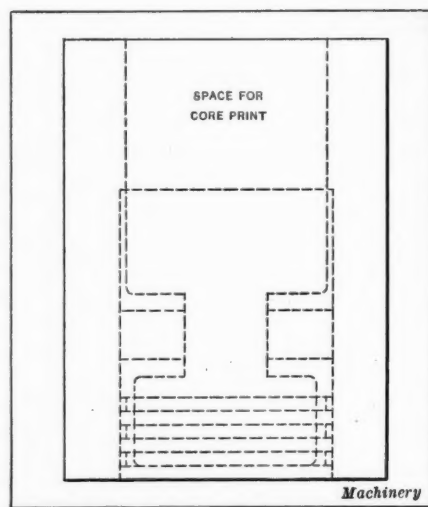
Split Piston held in a Wooden Block ready for making the Core
